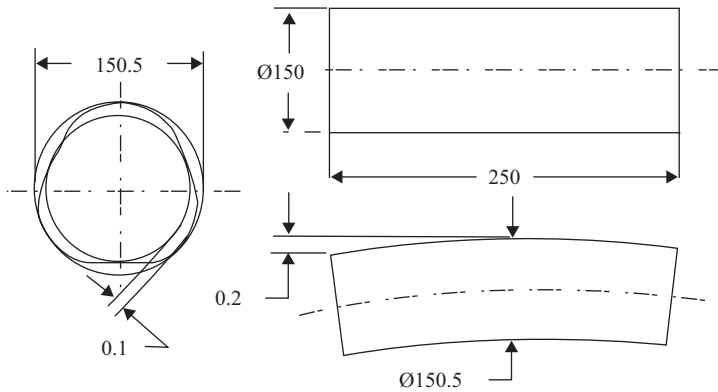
Possible good part that meets diameter tolerance
